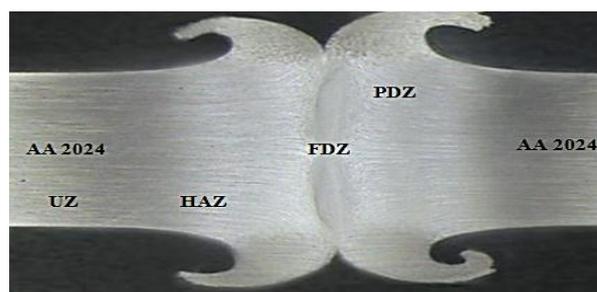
Friction welded similar joints of AA 2024 cross sectional view
